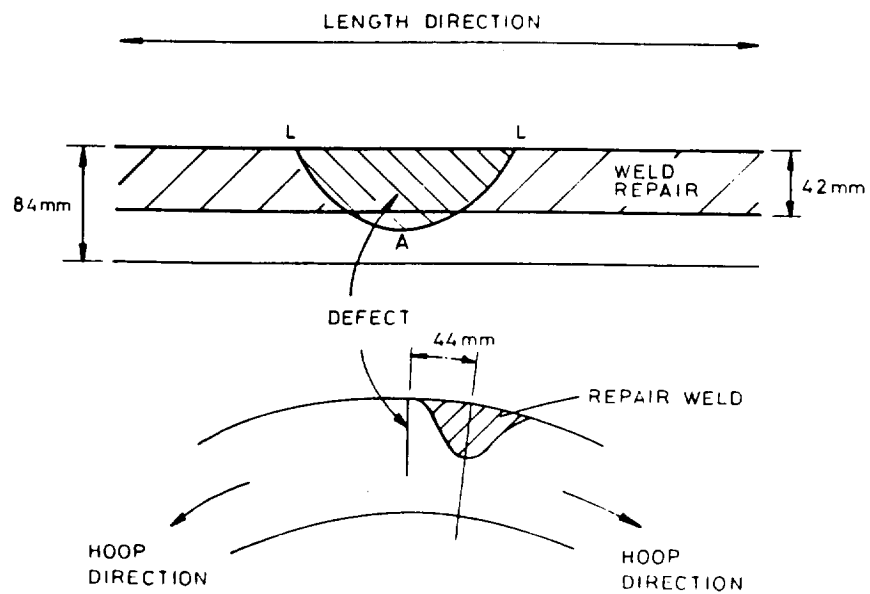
Location of the flaw in the CEGB Test 3 pressure vessel with respect to the weld repair. The flaw was in a stress relieved seam weld.
